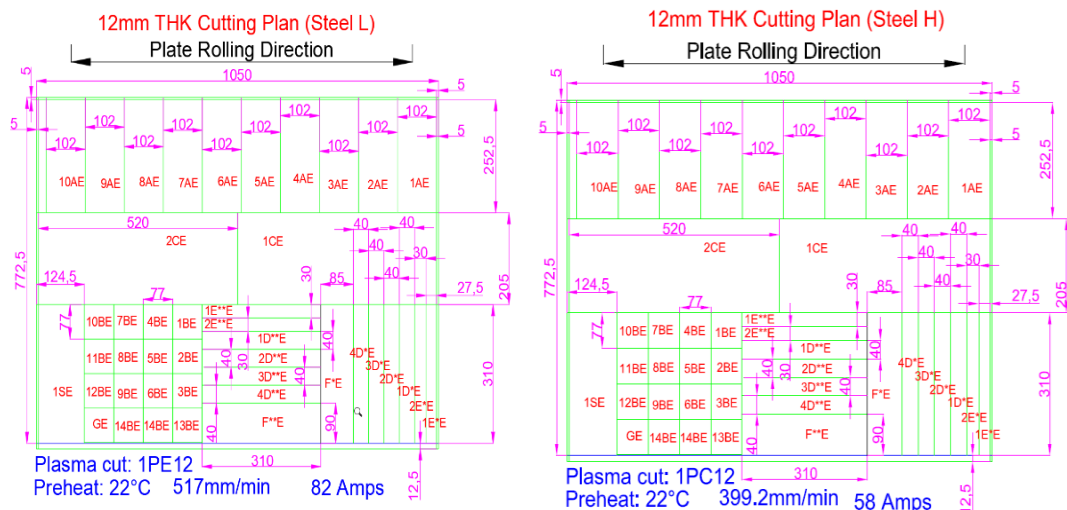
Cutting layout of 12mm Plate Steel L and Steel H.
